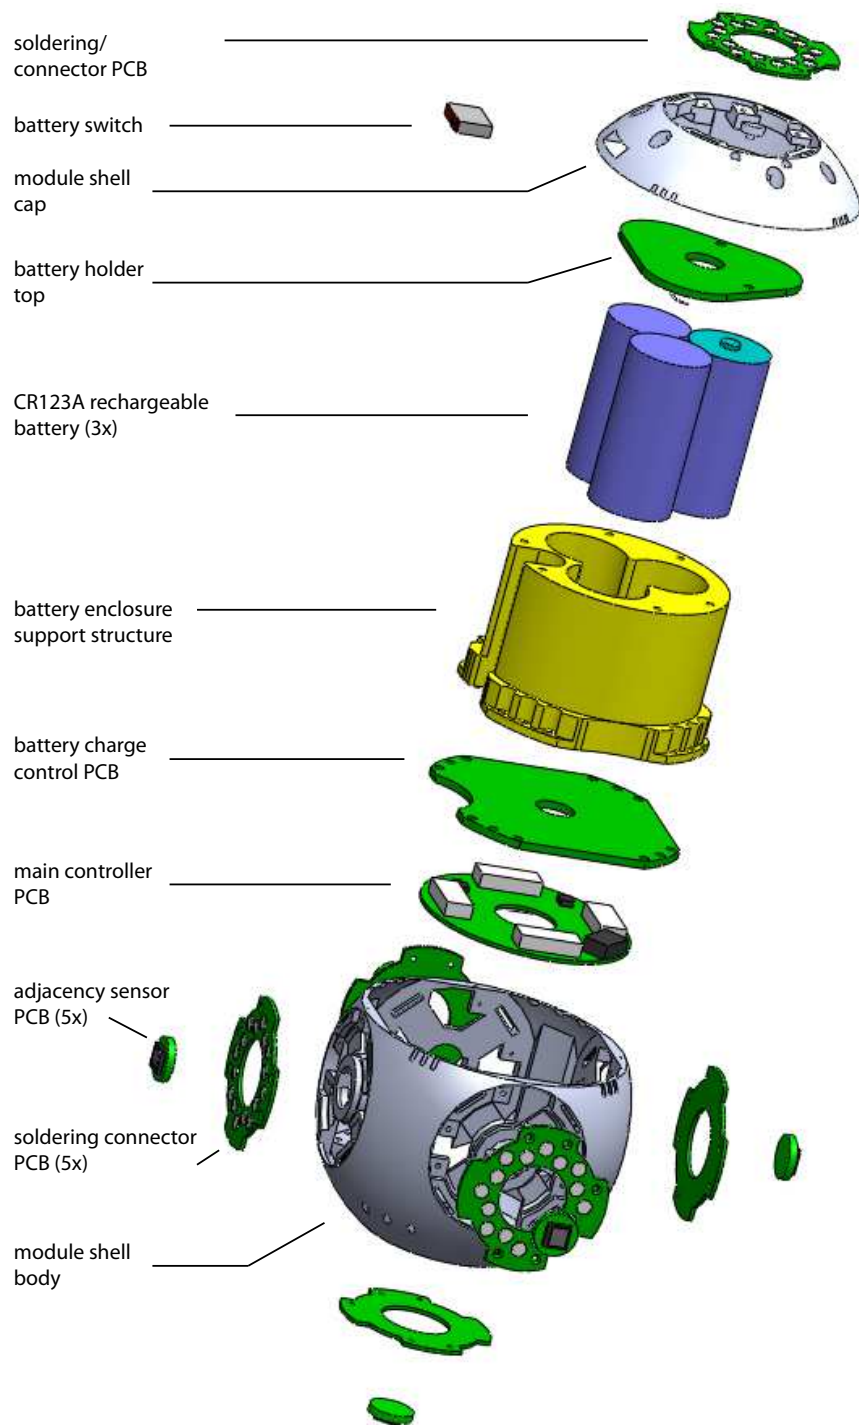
Exploded view of Soldercubes energy module. Fasteners, magnets, and wires omitted for clarity.
